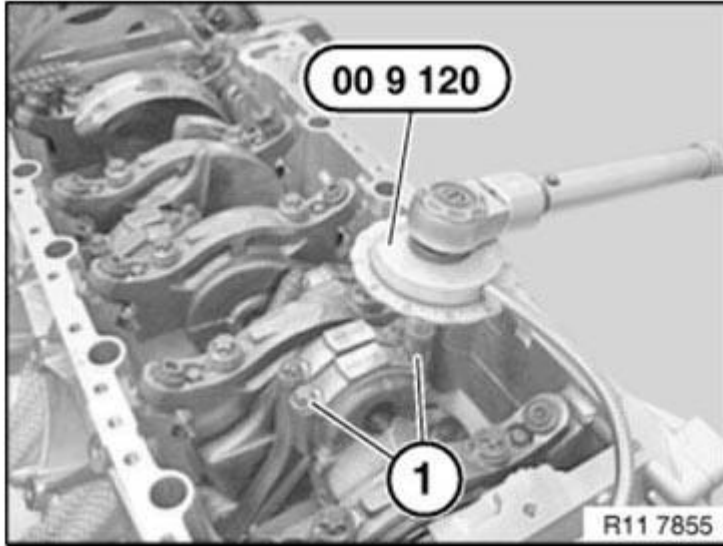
Securing Connecting Rod Bolts With Special Tool 00 9 120
